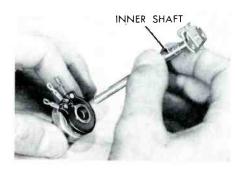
B. The Inner Shaft Is Inserted in the Rear Element.
